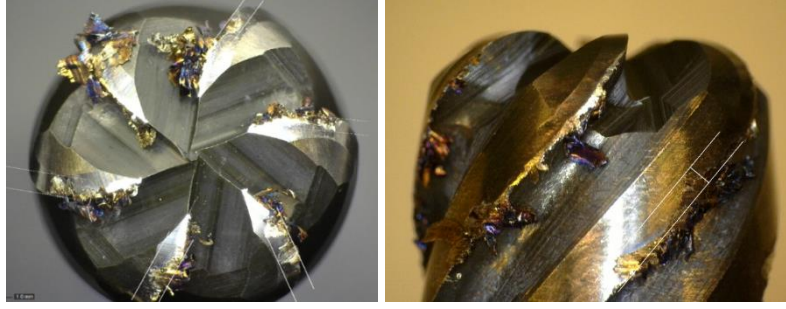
Calculation of maximum VB: (a) calculation of the VB on the solid milling tools where there was greater wear on the cutting edges at the top of the tool; (b) calculation of the VB on the solid milling tool that showed greater wear on the side cutting edges.
